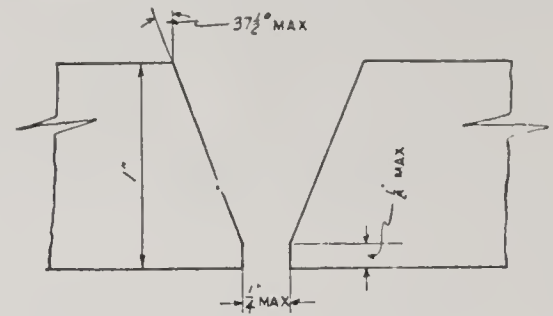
(b)—Alternate Butt Joint for Plate 1 In. Thick (May be Used for the Oxyacetylene Process Only)
